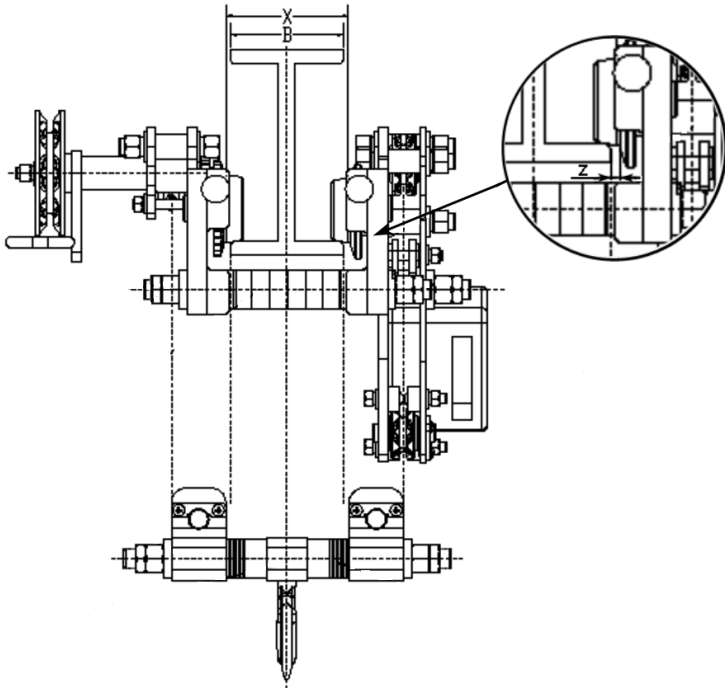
Tolerance “Z” between I-beam flange and the flange of the trolley wheels.
